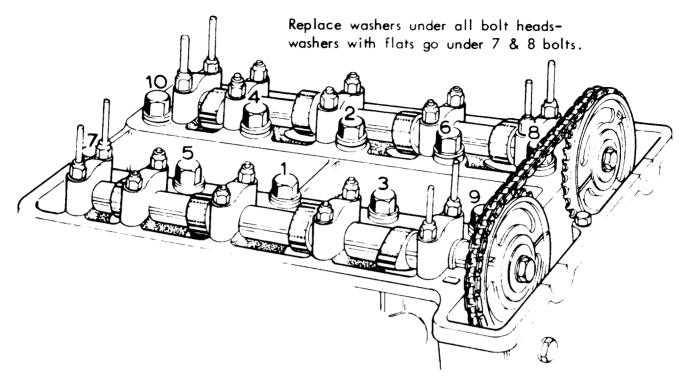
SEQUENCE OF TIGHTENING CYLINDER HEAD BOLTS.
